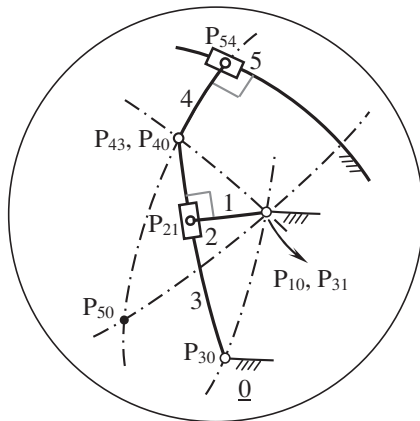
The spherical-shaper mechanism at a type (III) singularity.
